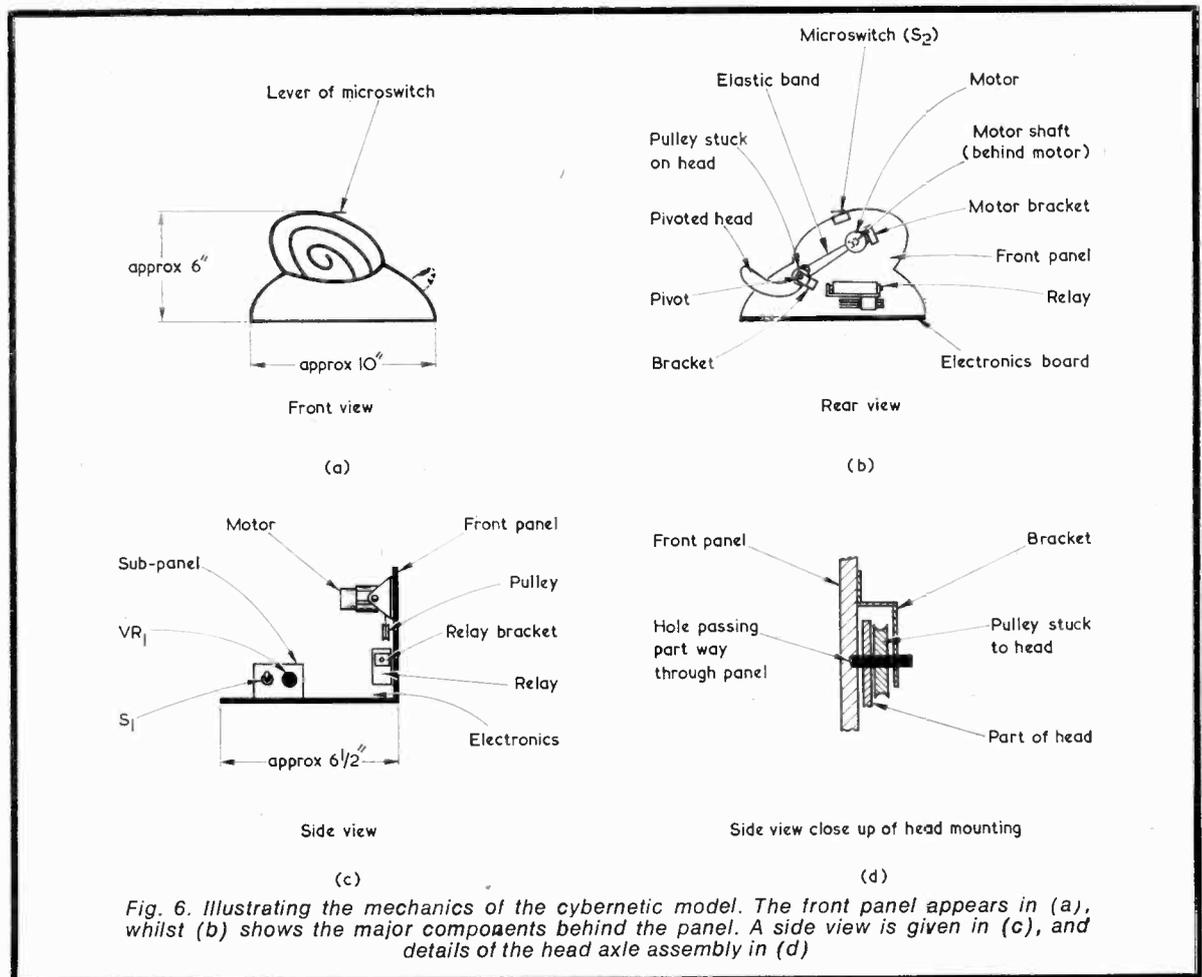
Illustrating the mechanics of the cybernetic model. The front panel appears in (a), whilst (b) shows the major components behind the panel. A side view is given in (c), and details of the head axle assembly in (d)
